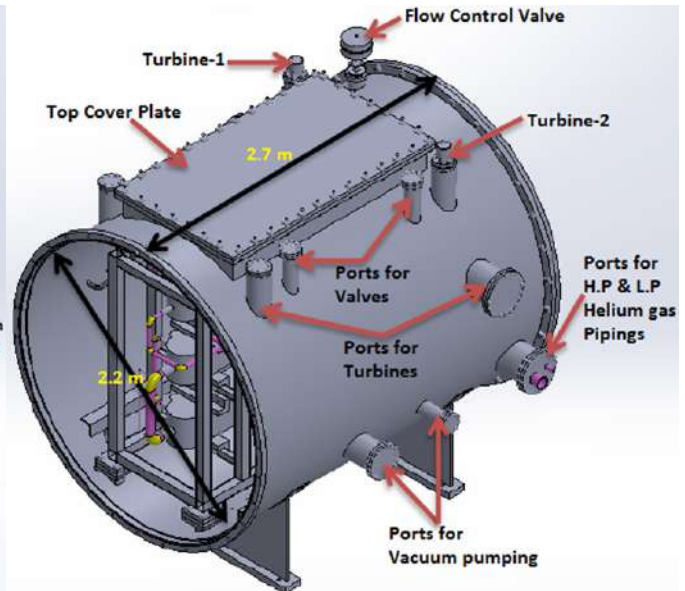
Vacuum Chamber for turbine-Test Facility
